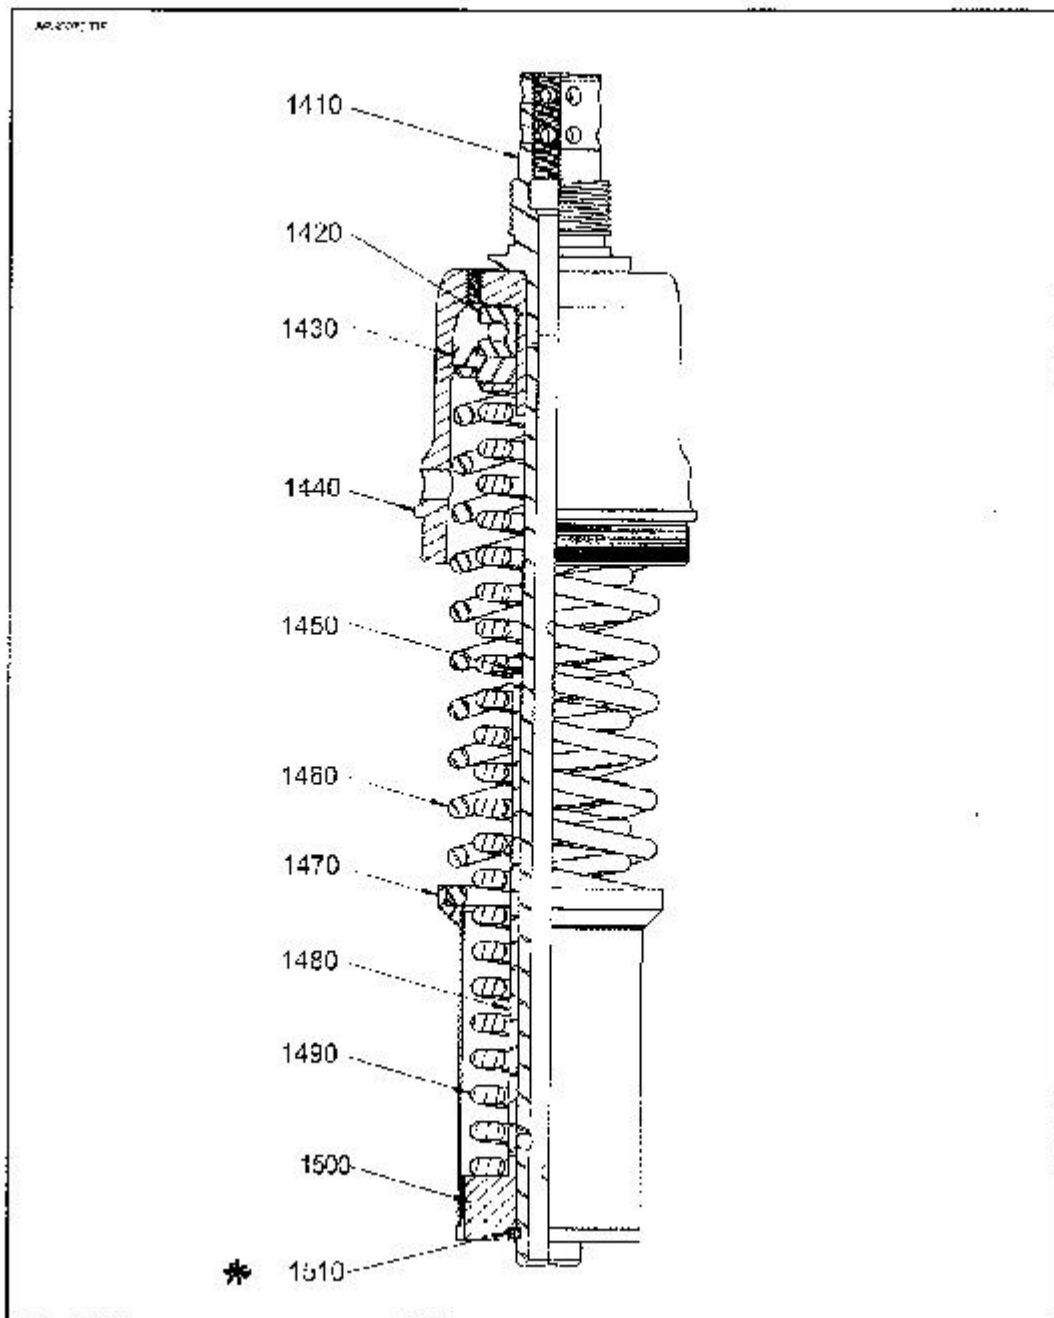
Propeller feathering mechanism spring assembly. The split retainer is component number 1510, indicated with a '*'.
